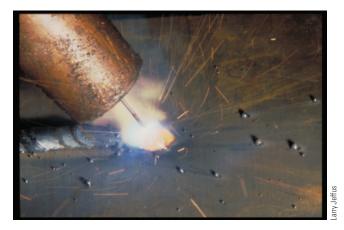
This GMA welding can be seen in the Gas Metal Arc Welding video series on tape 2.
